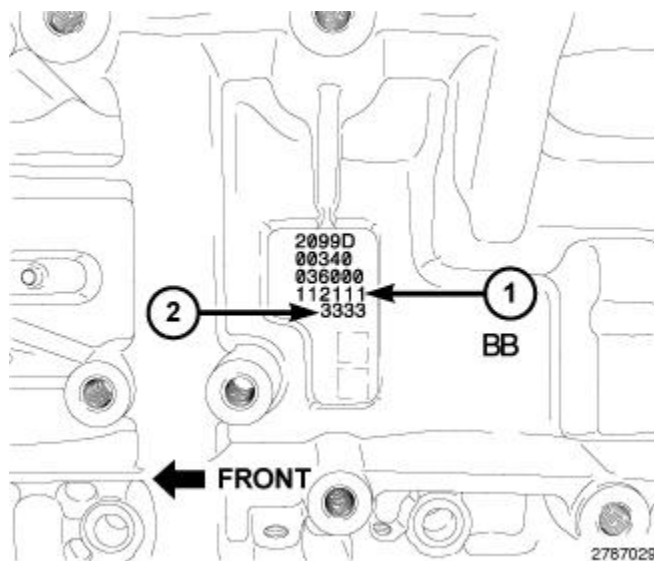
Engine Block Main Bearing Journal Diameter Grade Markings
